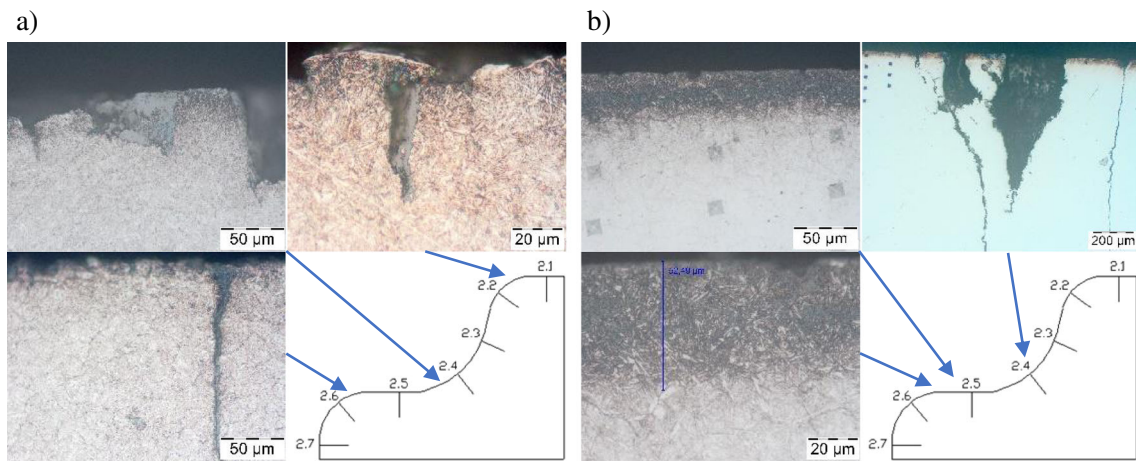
Microstructural view of selected points marked on the cross-section of the tool: a made of Unimax steel after producing 4372 forgings, b a punch nitrided with a low potential after producing 6249 forgings
